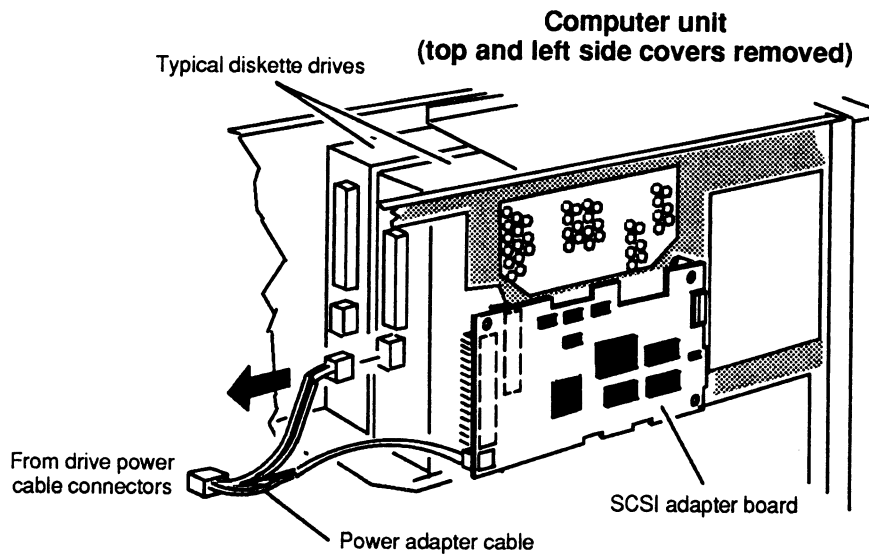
Unplugging the Power Adapter Cable from a Diskette Drive
